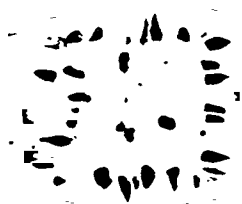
Section of Honeycombed Crucible Steel Ingot.
